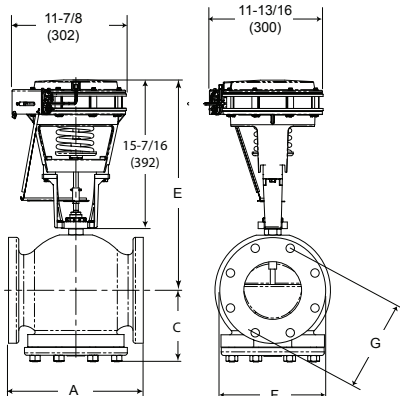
MK-6911 with Flanged 2-Way Globe Valves
